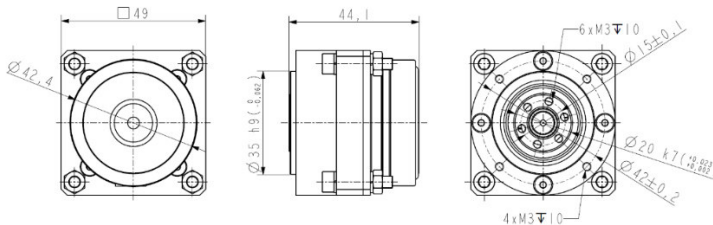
Front, side, and back view of Wavedrive's smallest precision drive unit
